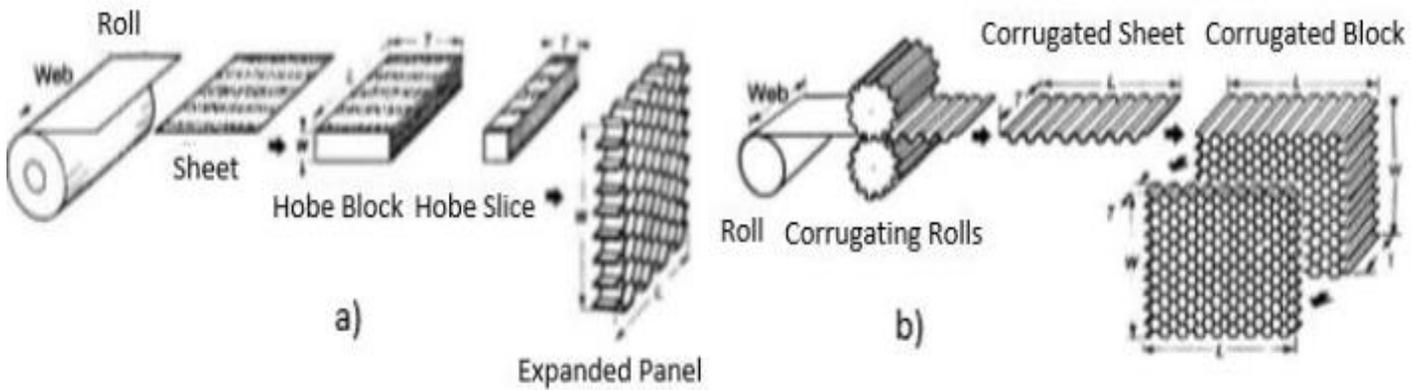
Traditional honeycomb core manufacturing methods a) Expansion method of core manufacturing, b) corrugation method of core manufacturing [12].
